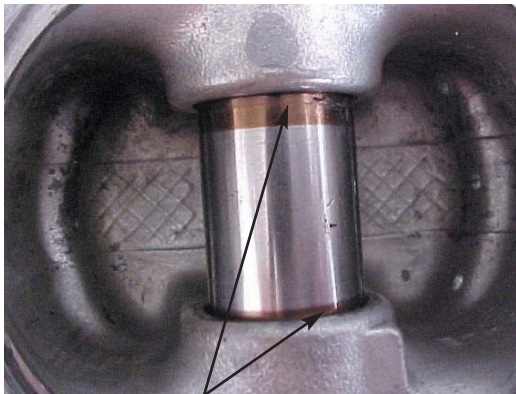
Eccentricity between the con rod and the piston pin
